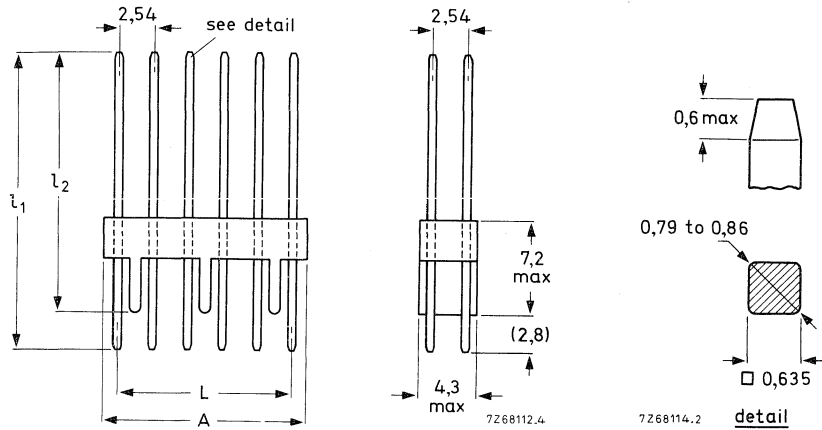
Mounting block for pins, double row. See Table 3 for dimensions l_1 , l_2 , A and L.
